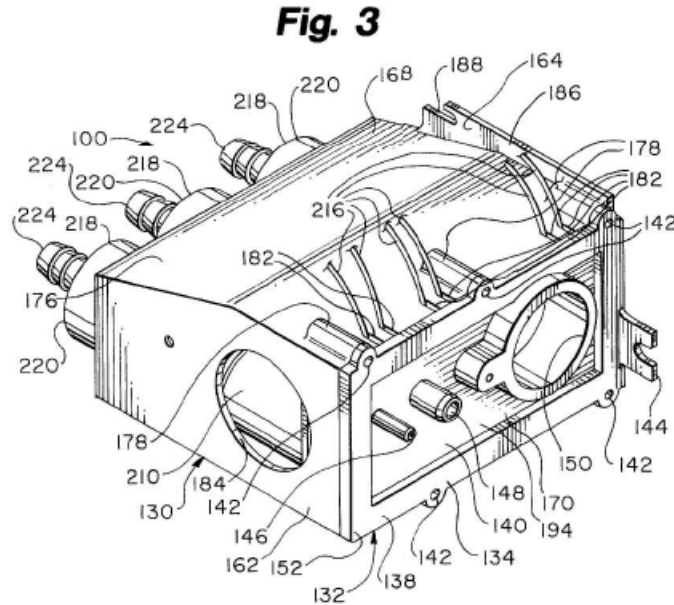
is a perspective view of the claimed valve assembly. Ex. 1001, 3:31–32.
